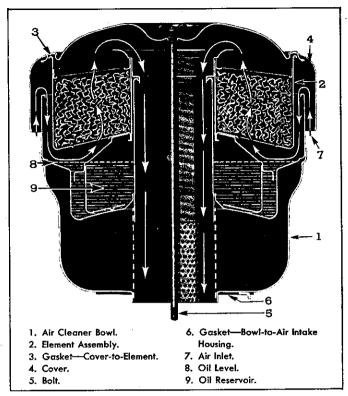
Oil Bath Air Cleaner and Silencer Assembly.
